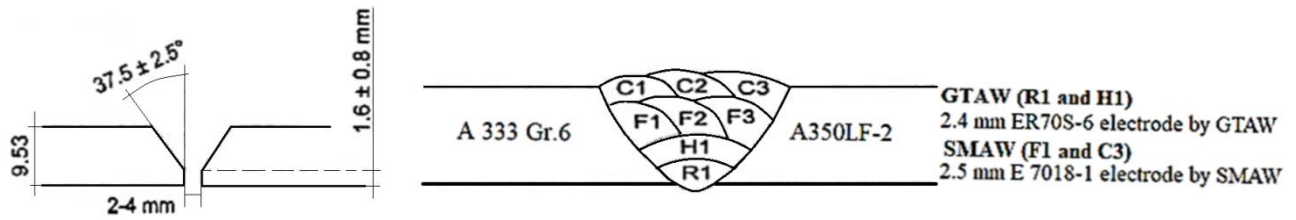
Weld groove, base metals, welding electrodes, welding methods and welding passes used in the W-A coded welding process
